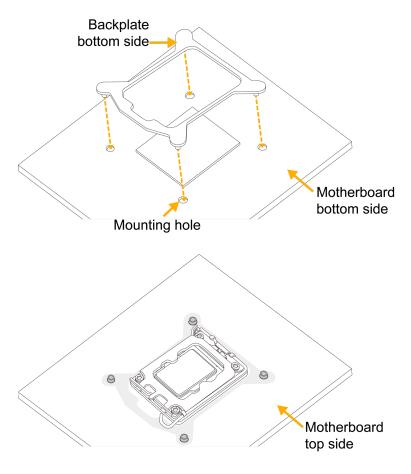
Attach the Backplate to the Bottom Side of the Motherboard
